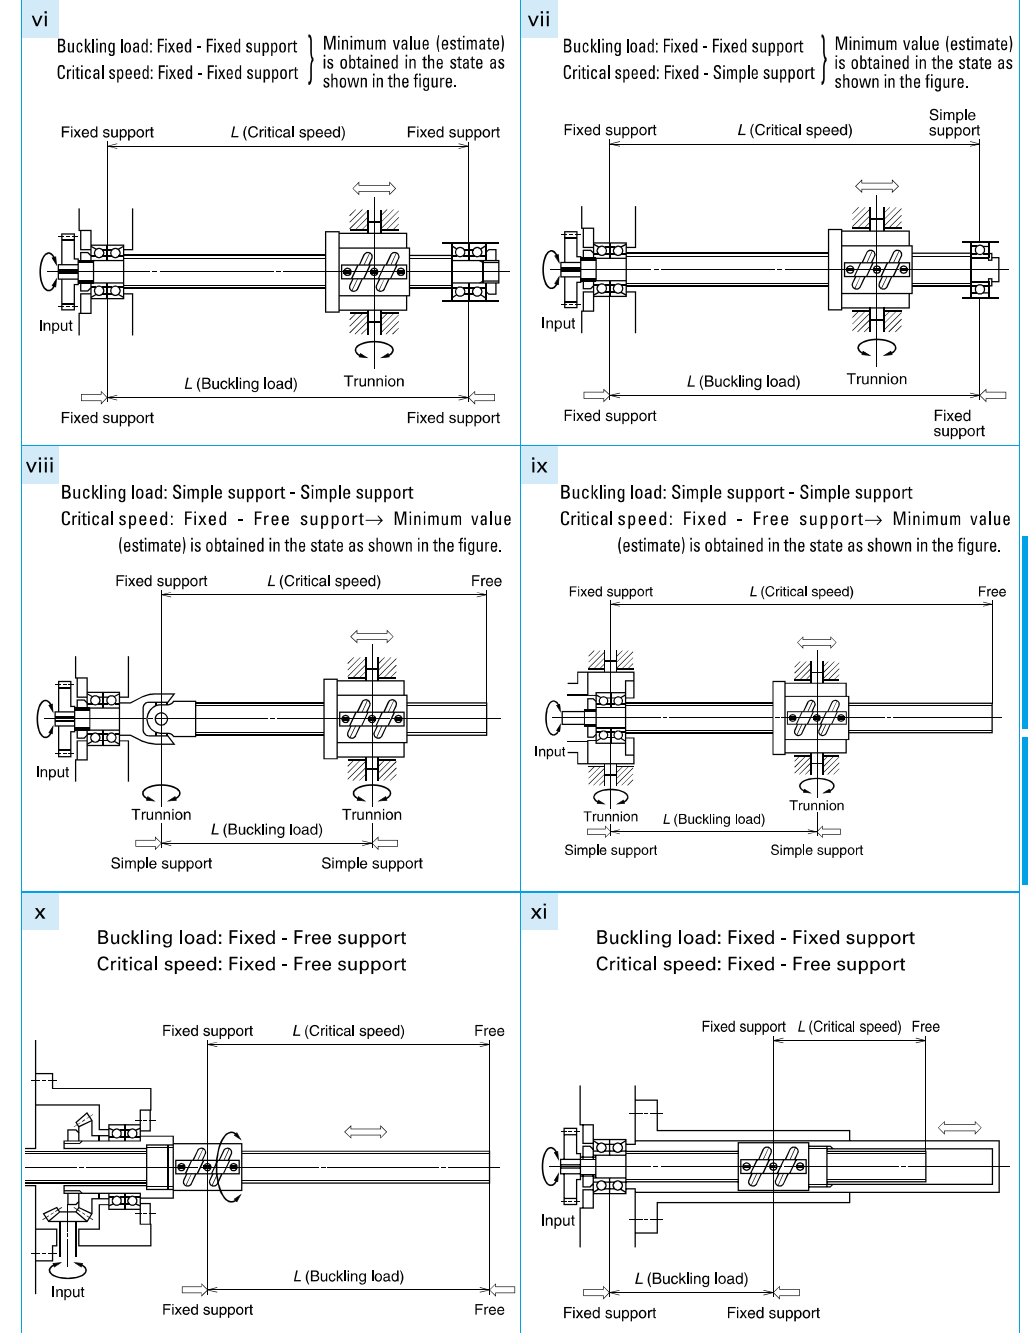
Supporting conditions of screw shaft and ball nut
